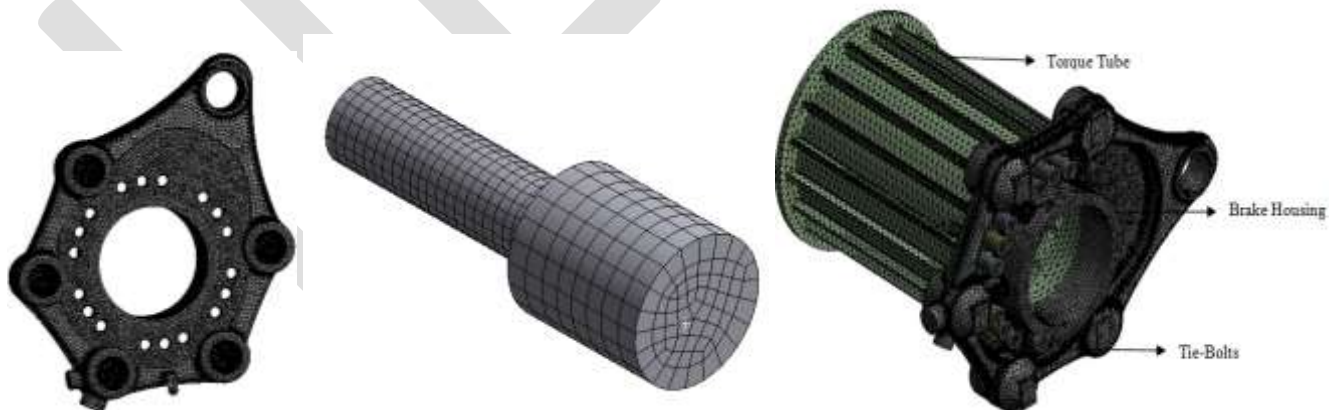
Meshed CAD models of Brake housing, Tie-Bolt & Assembly.
